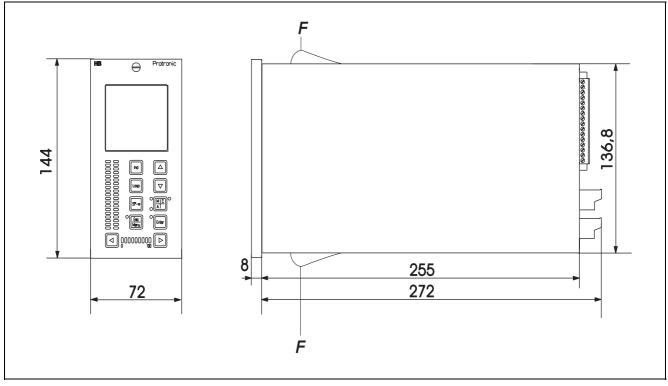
Dimensional drawing (dimensions in mm)Z-19176FSpring contacts
